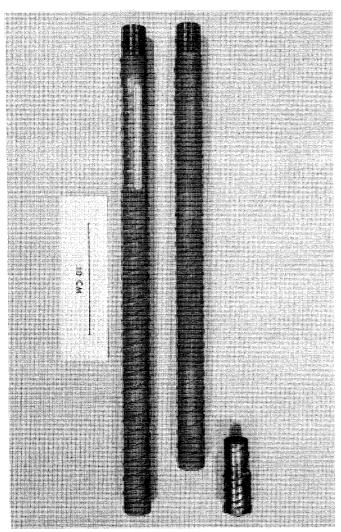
Standard length tube (upper stem section), bitholding core tube (lower stem section) and drill bit (NASA photo S89-25295).
